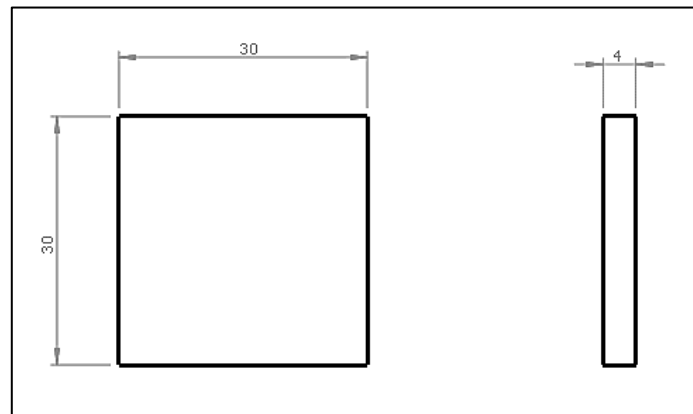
SOLIDWORKS DRAWING OF TEST PLATE USED TO OPTIMIZE CHEMICAL POST-PROCESSING
